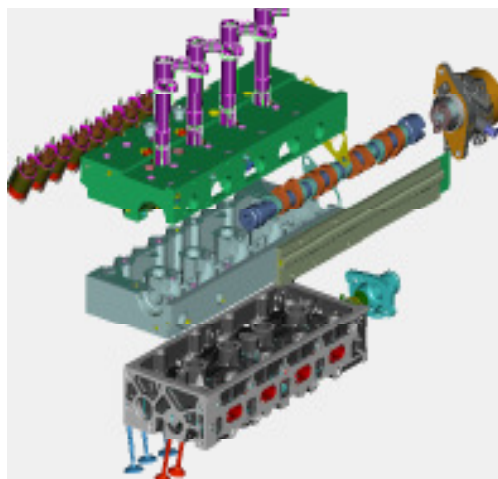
Cylinder head assembly & Upper cylinder head architecture
